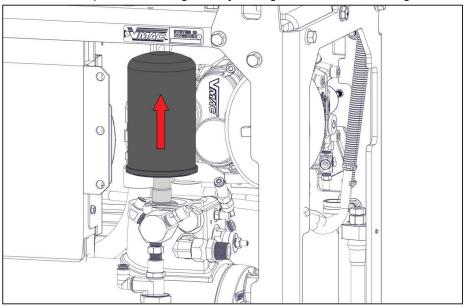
Coalescing filter (PTFE lines removed for clarity)
